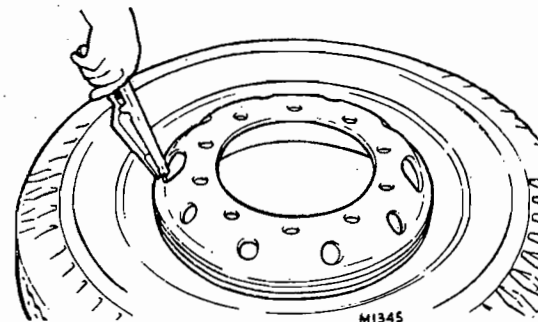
REMOVING VALVE ALIGNMENT TOOL
